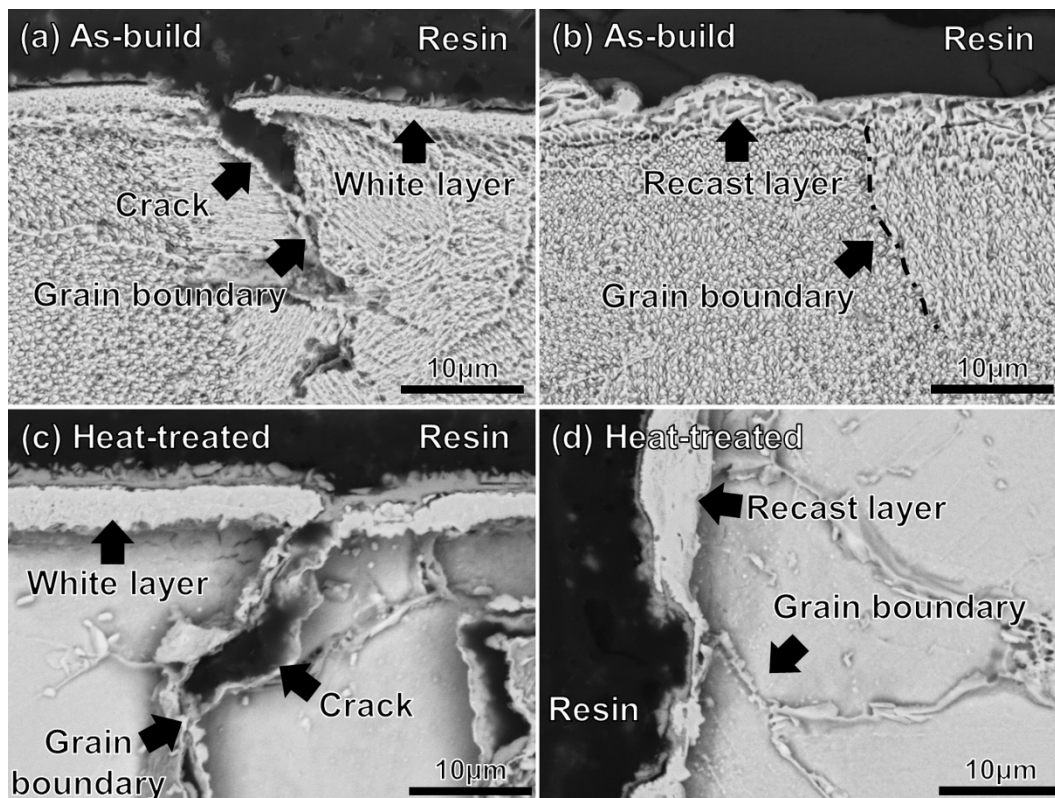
Conditions of surfaces treated with different methods, CNC machined (a) and WEDM cut (b) surfaces in as-build sample (ABMix), CNC machined (c) and WEDM cut (d) surfaces in heat-treated sample (HTMix)
